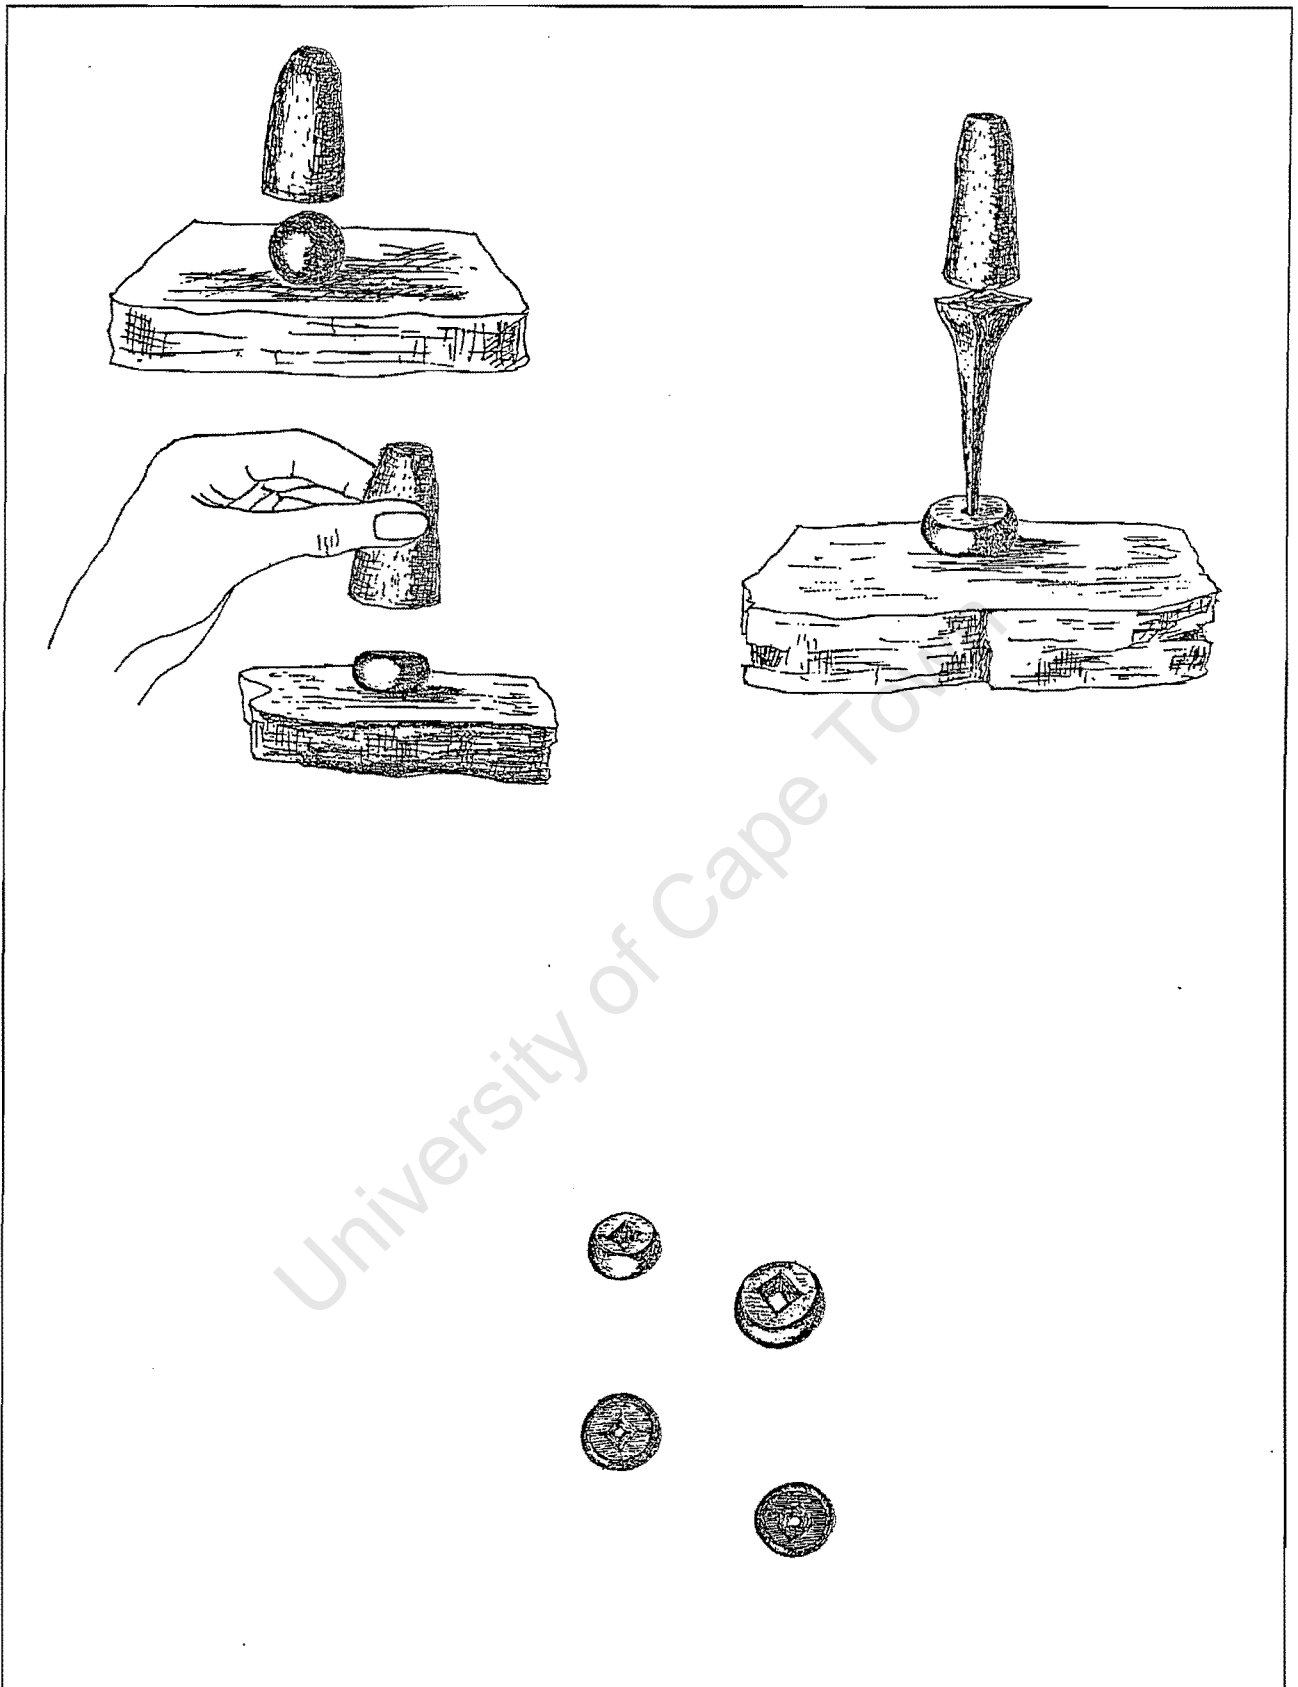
Punched Beads: A flattened prill is punched on both sides, resulting in a squarish hole. Through stringing wear (from being part of a necklace for instance) this squarish hole becomes larger and rounded (Drawing by C. Jardine)
